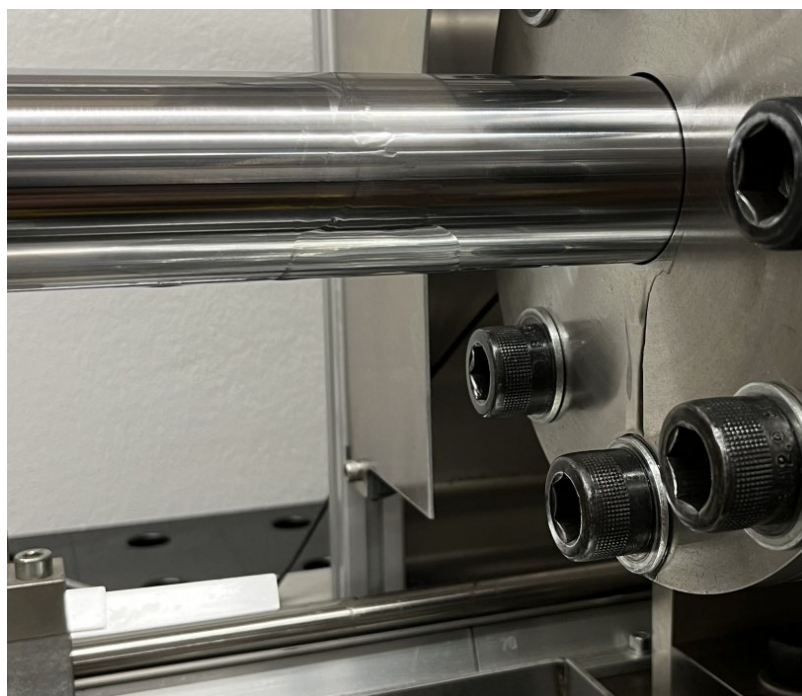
Severe leakage at 5 MPa with the assembled test seal 36
